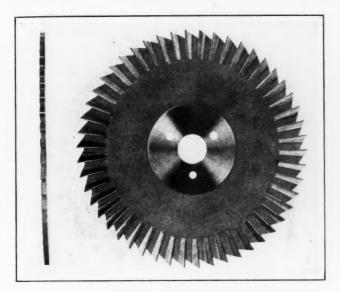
Goddard & Goddard Side Chip-clearance Saw for cutting Cast Iron
